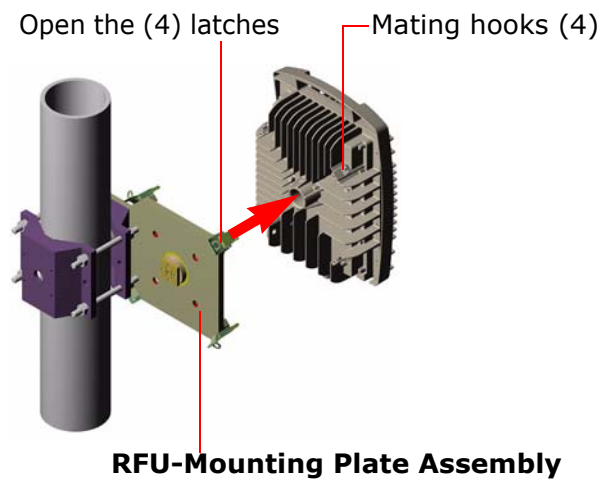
Removing the Detachable RFU from the Mounting Plate Assembly
